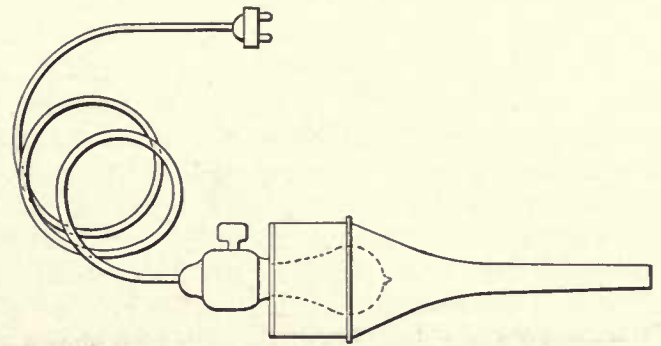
Device to Facilitate Taking Piston Valve Port Openings.
